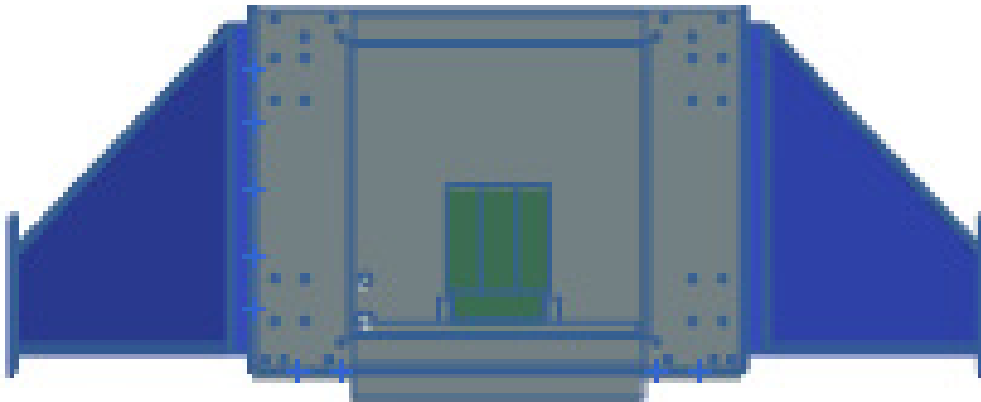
Front view of CAD model showing chamber, motor mount, base plate, entrance diffuser, and exit nozzle.
